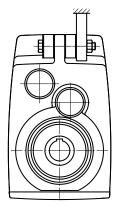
Mounting the rubber buffer (Option G or VG) on parallel shaft gear units
